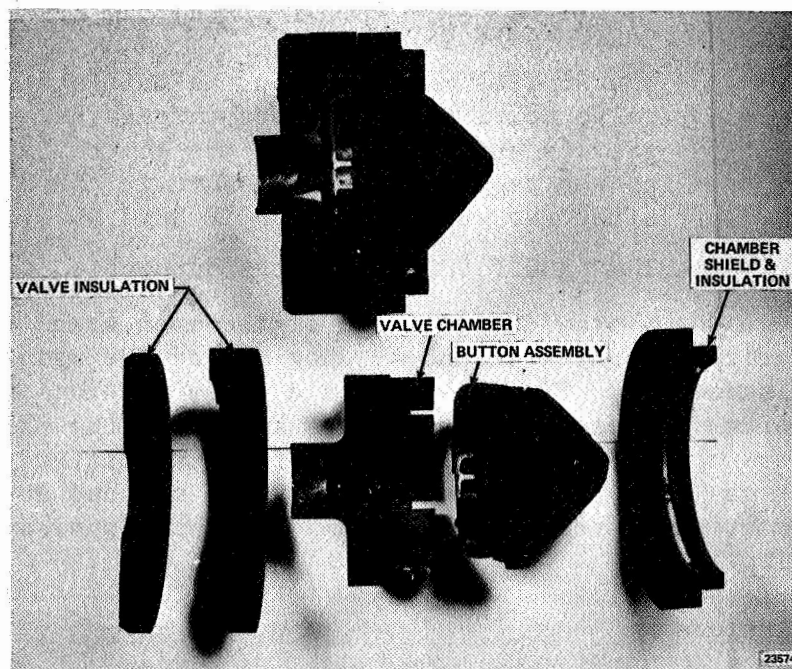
5500°F Vortex Valve Button and Chamber (Post-Test Disassembly)
